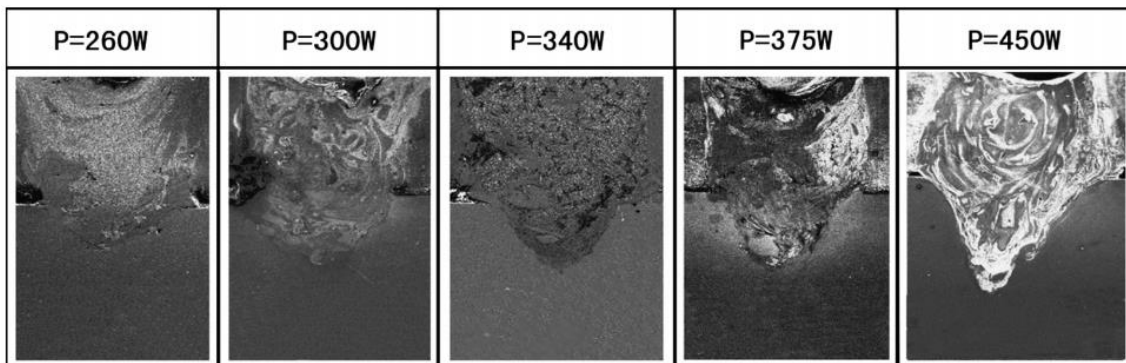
Impaired adhesive areas at different laser welding beam powers [33].
